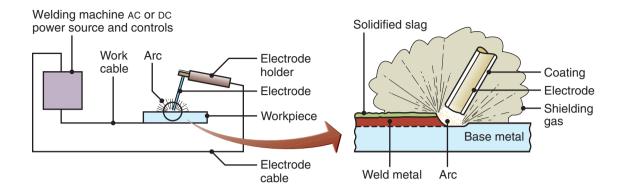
Schematic illustration of the shielded metal-arc welding process. About 50% of all large-scale industrial-welding operations use this process.
